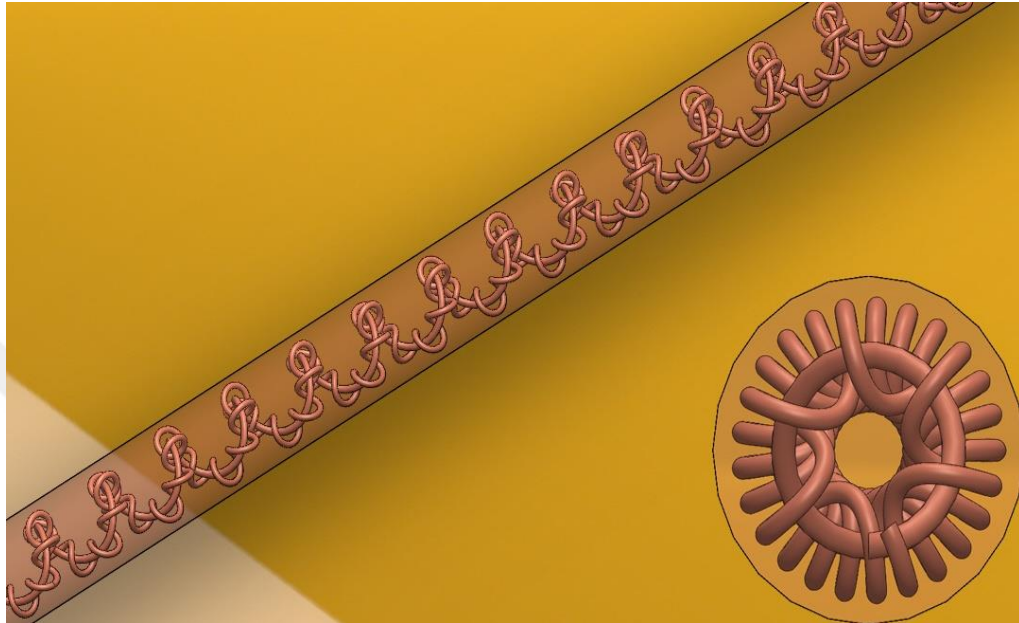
Geometry of the circular wire coil insert around circular wire coil in tube fitted type two
